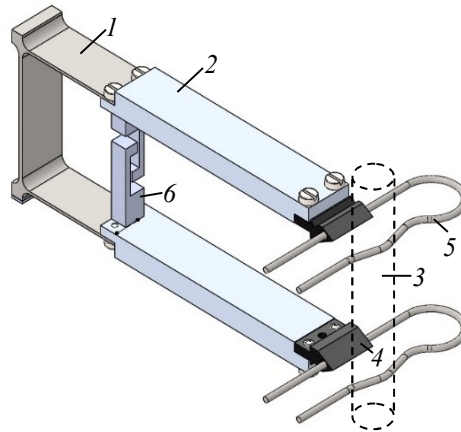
CAD model of the Schenck longitudinal extensometer: 1 – elastic (flexure) element; 2 – sensor arms; 3 – test specimen; 4 – knife edges; 5 – spring clips; 6 – travel stop.
